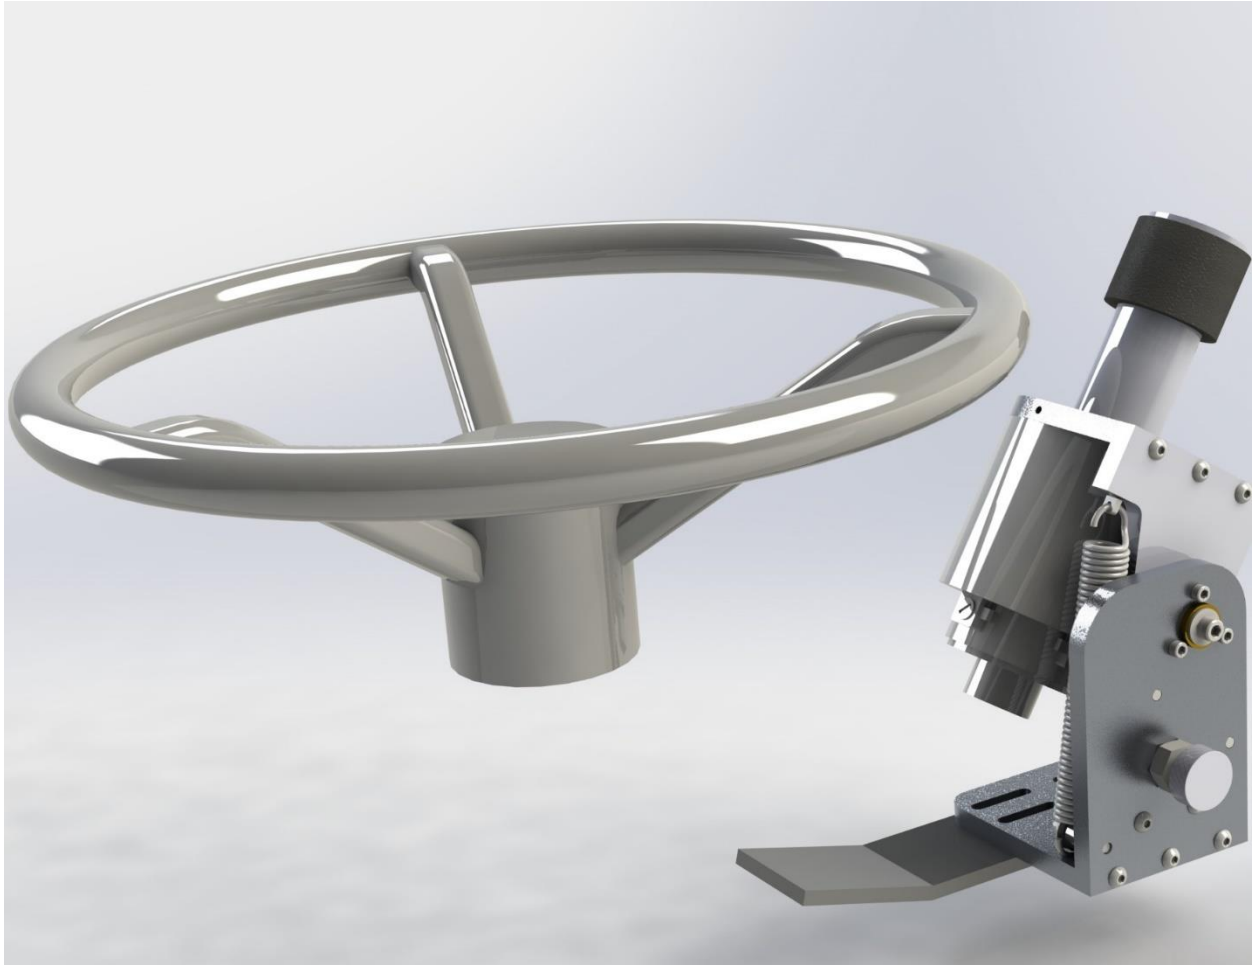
CAD render of the “storage” state of the steering actuator assembly
